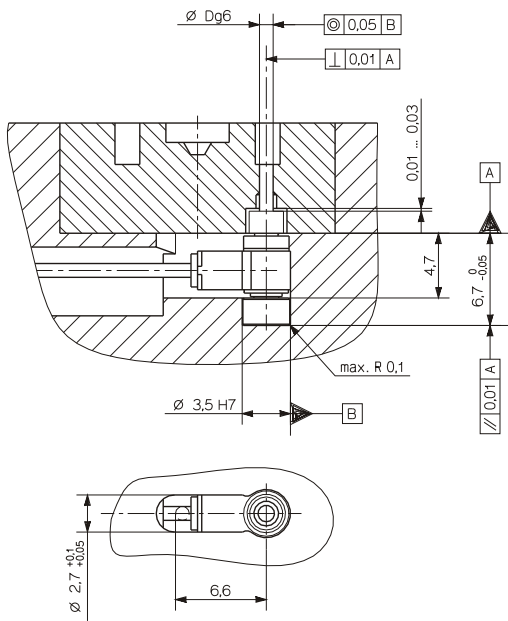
Mounting in blind hole with measuring pin and hardened thrust washer  $\varnothing$  3,5 mm (Art. No. 3.211.585)
